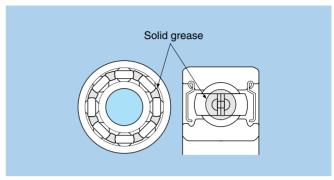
Deep groove ball bearing with spot-pack solid grease (Z shield) (Standard for deep groove ball bearings)
